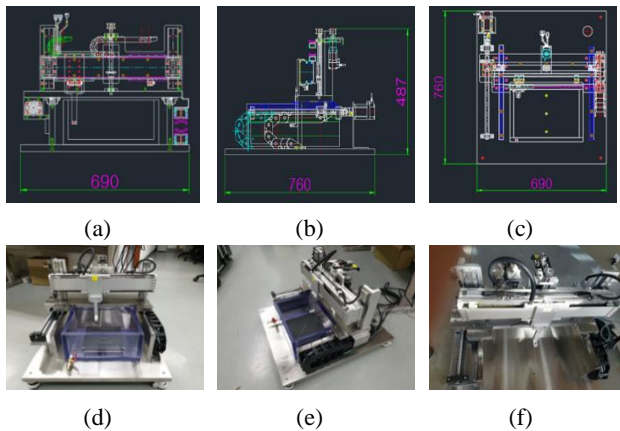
Front view, side view and top view of manufactured 3-axis control device. (a) to (c) design images and (d) to (f) produced images
